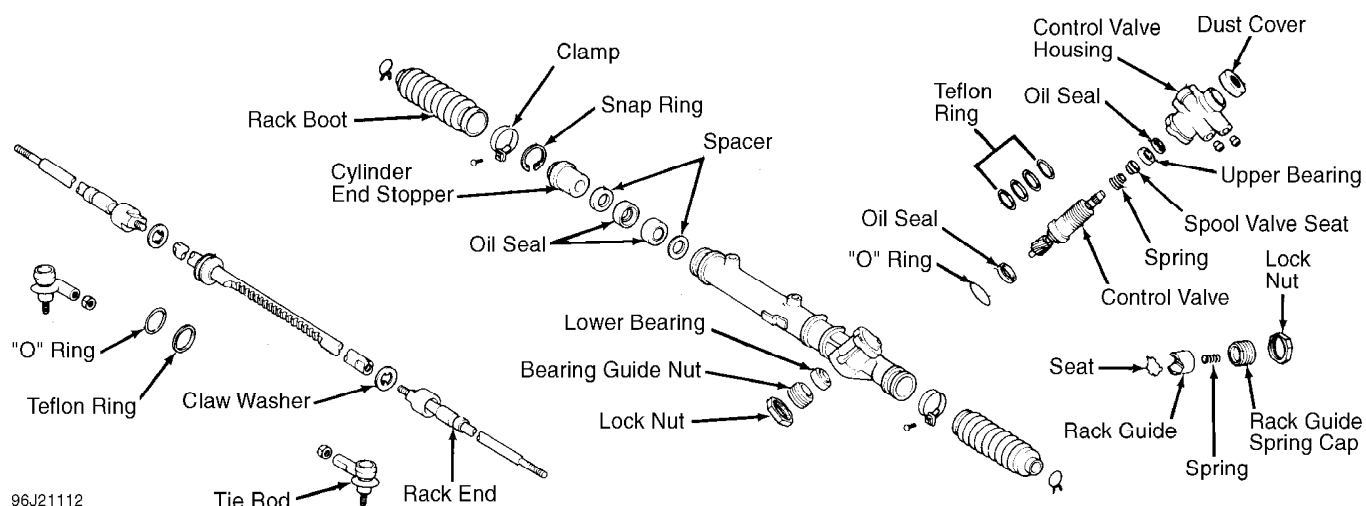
Exploded View Of Power Rack & Pinion Steering Gear Components (Celica)
